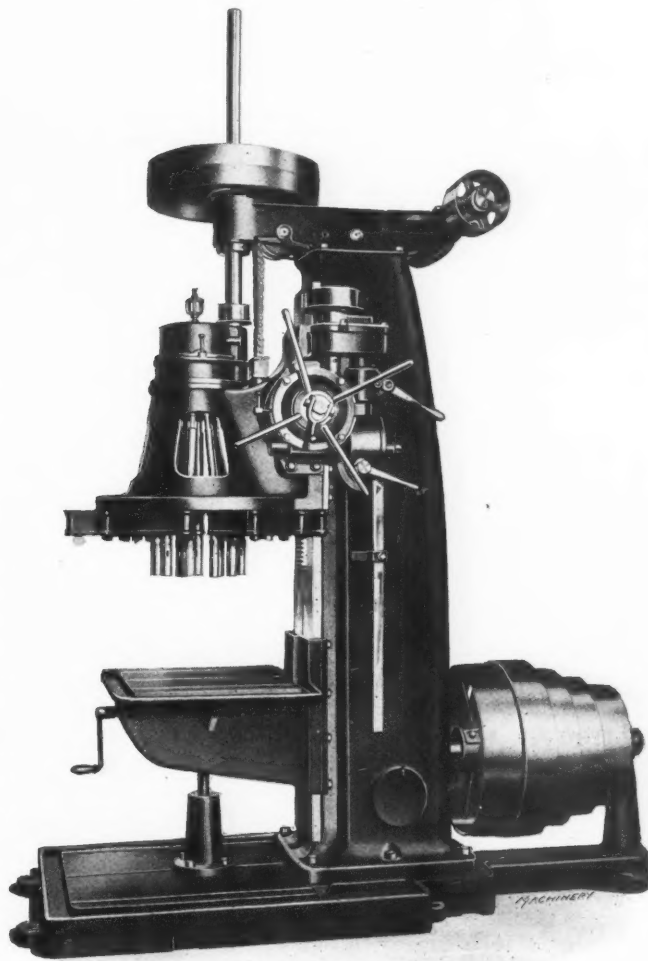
Harrington No. 51 Multiple Spindle Drilling Machine
